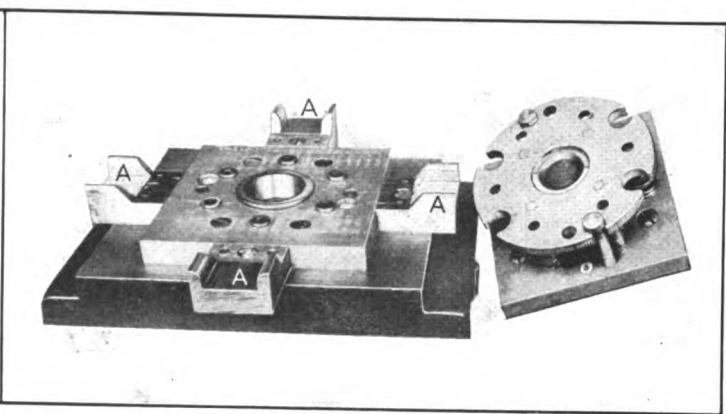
PUNCH AND DIES FOR BOLT HOLES
